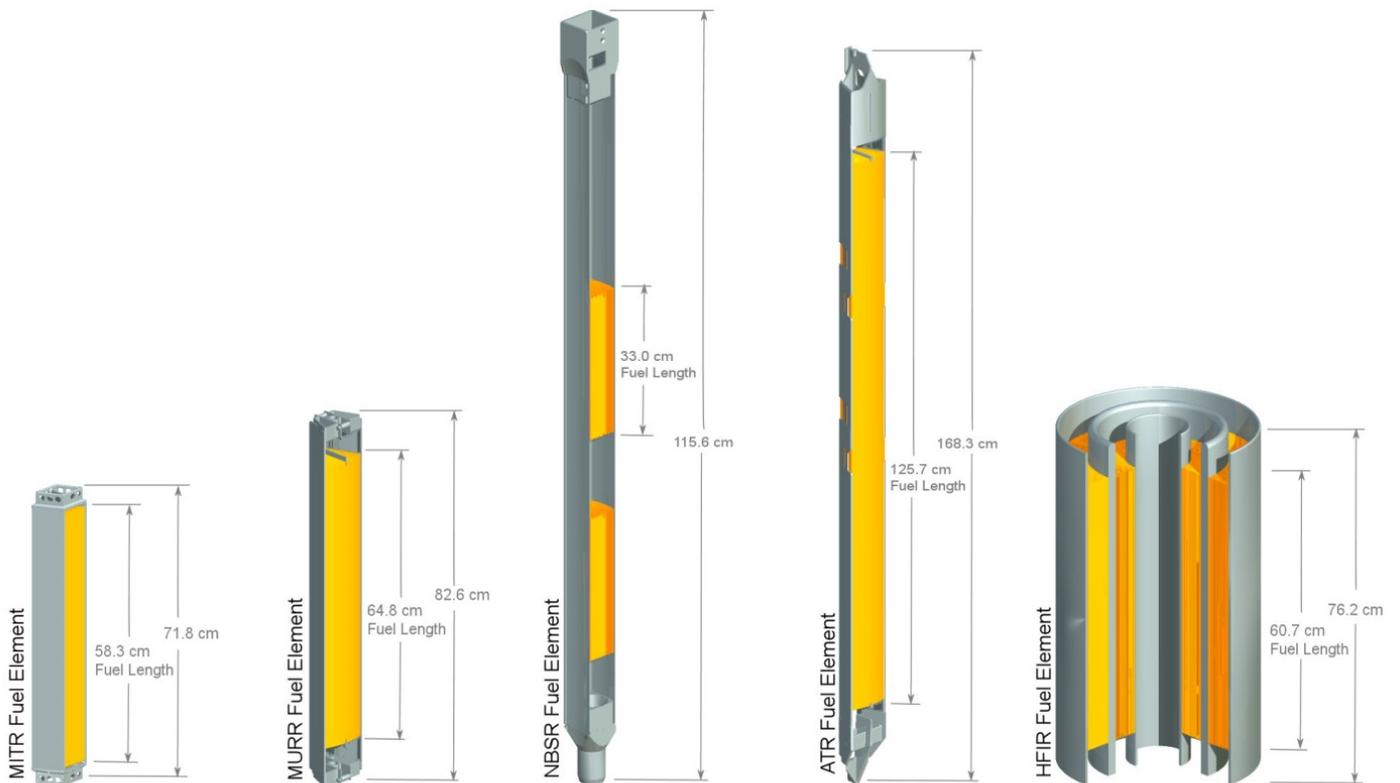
HPRR Fuel Assembly Designs, Isometric Views
